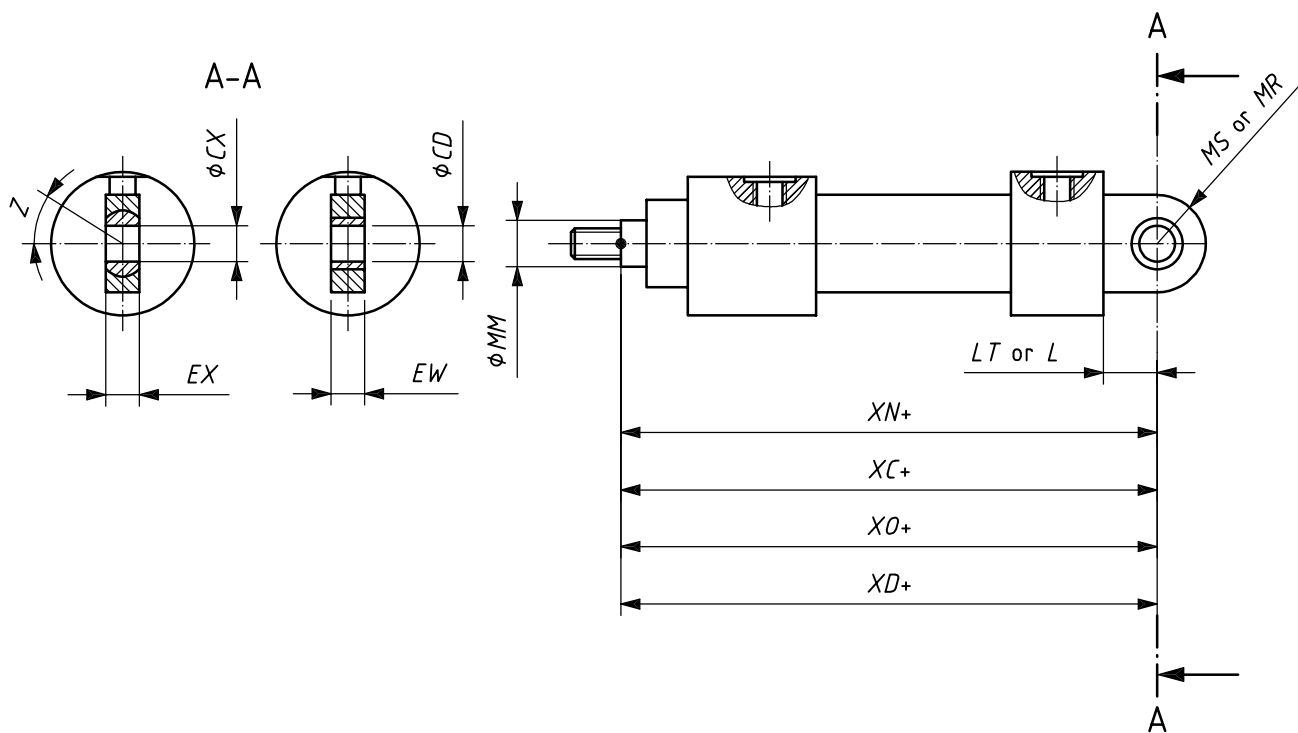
MP3 — Cap, fixed plain eye, MP4 — Cap, detachable plain eye, MP5 — Cap, fixed eye with spherical bearing and MP6 — Cap, detachable eye with spherical bearing
